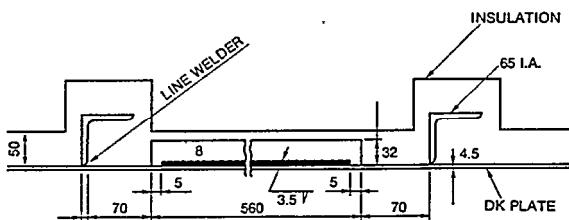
FLAT BAR INSTALLATION DETAIL
